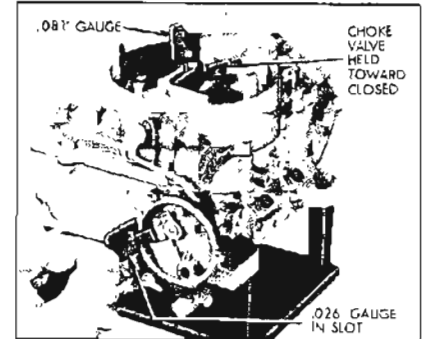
Choke Piston Adjustment place Tool J-5197 on lower section of choke rod and bend as necessary.
